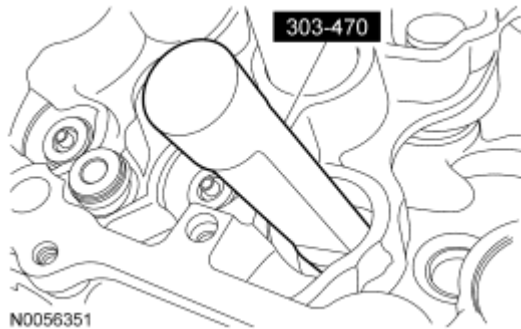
Installing New Valve Stem Seal Using Special Tool (303-470)
